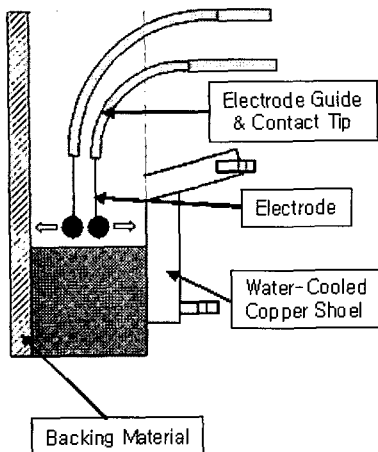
2-pole electrogas welding with a moving copper shoe and backing Material
